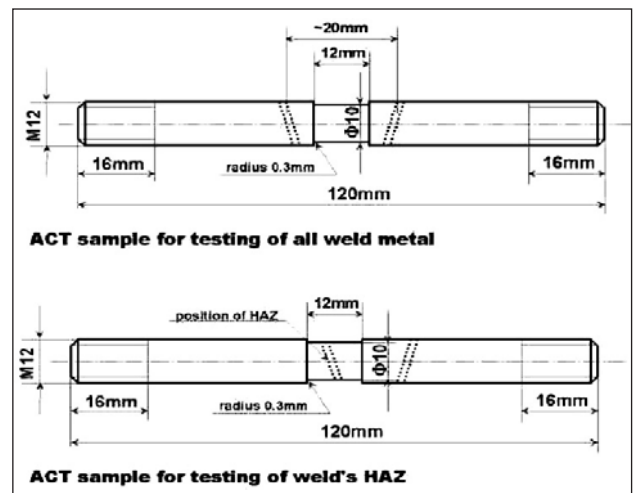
Cross-weld samples used for ACT on all-weld metal and on weld’s HAZ in the “SmartWeld” EU project
